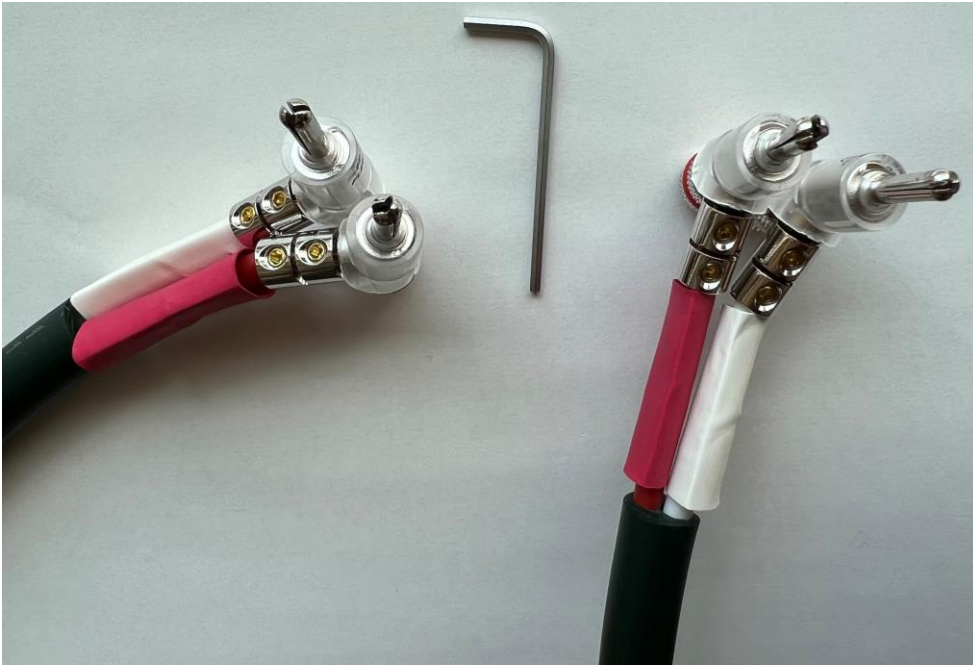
Assembly of Furutech FP-202(R) connectors with Furutech u-2T speaker cable.
